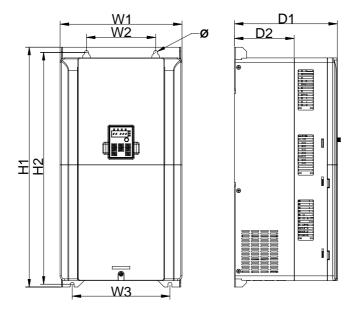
Wall installation diagram for 380V 45kW-55kW VFD models
